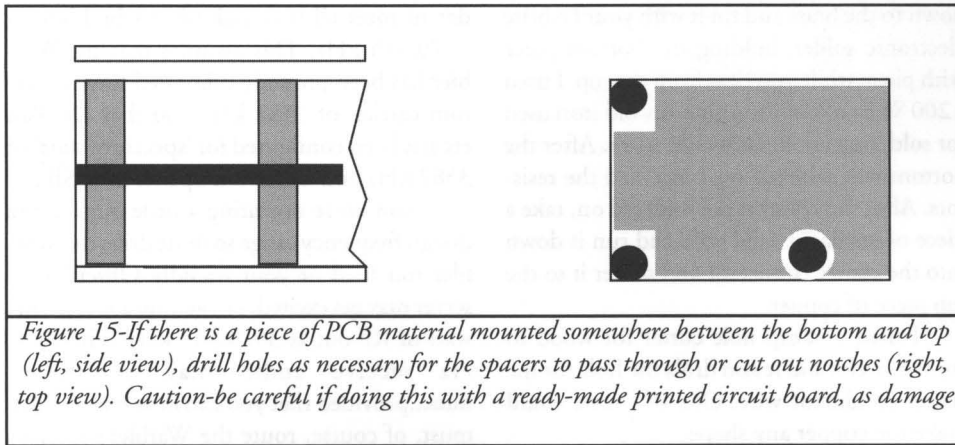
If there is a piece of PCB material mounted somewhere between the bottom and top (left, side view), drill holes as necessary for the spacers to pass through or cut out notches (right, top view). Caution-be careful if doing this with a ready-made printed circuit board, as damage
